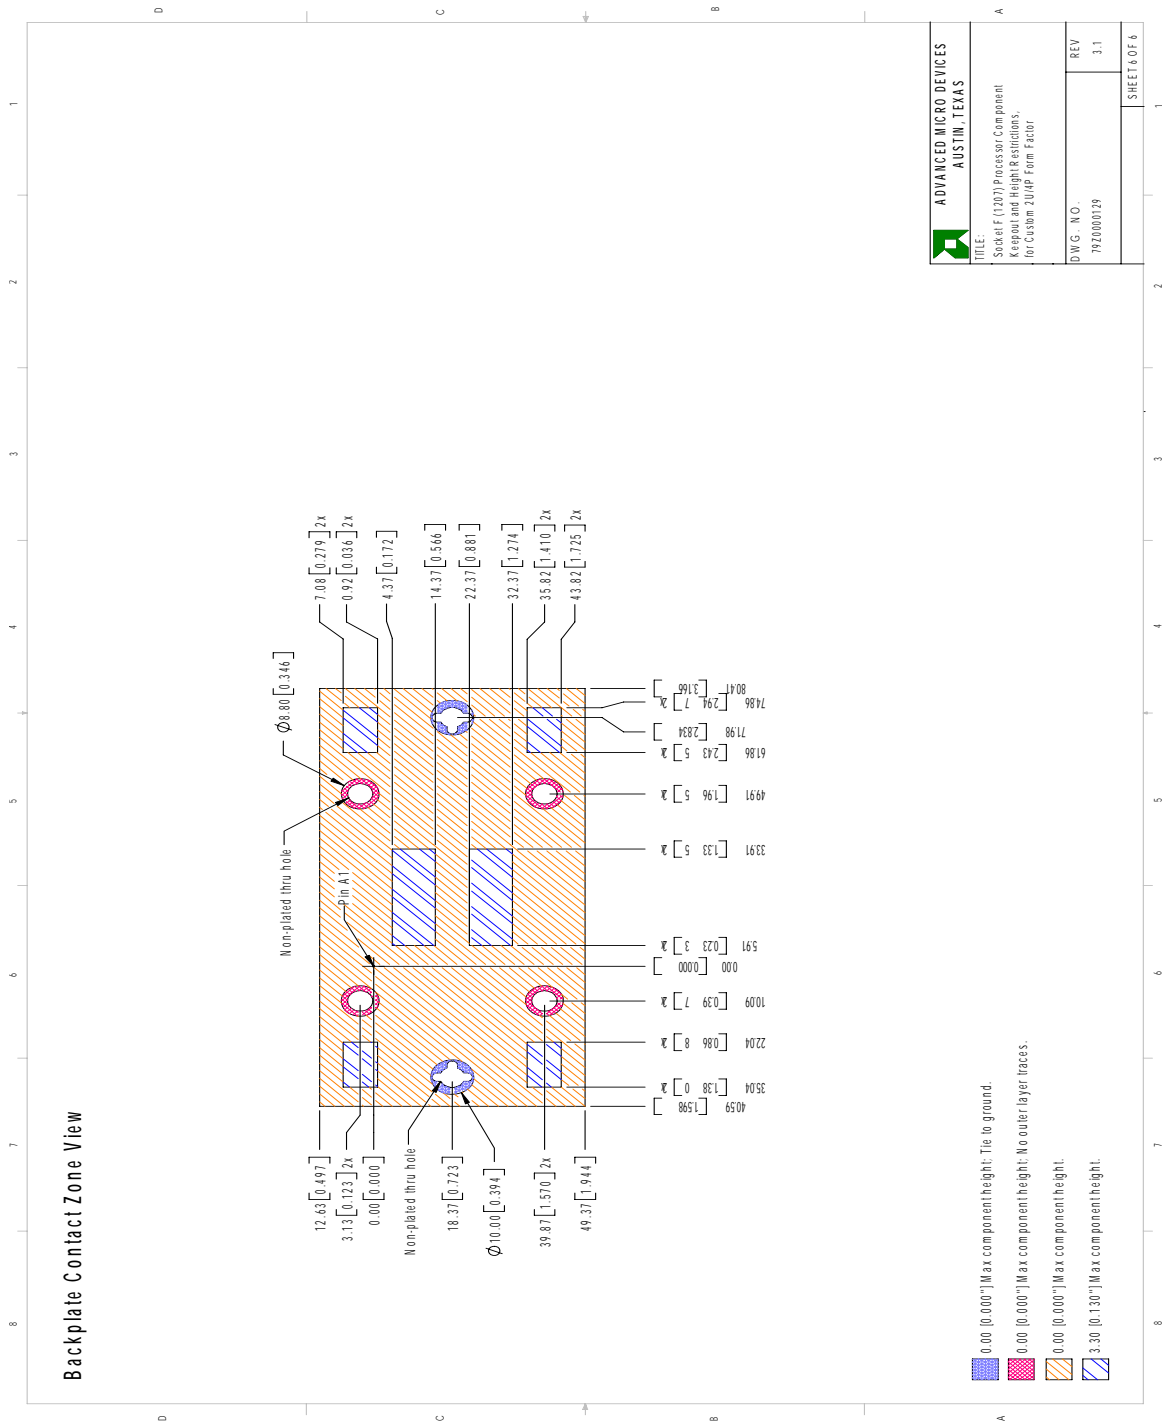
Socket F (1207) 2U-4P Backplate Contact Zone
